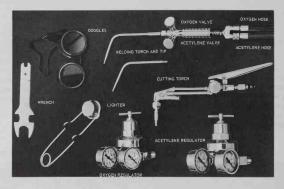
Basic accessories for welding with oxyacetylene.
